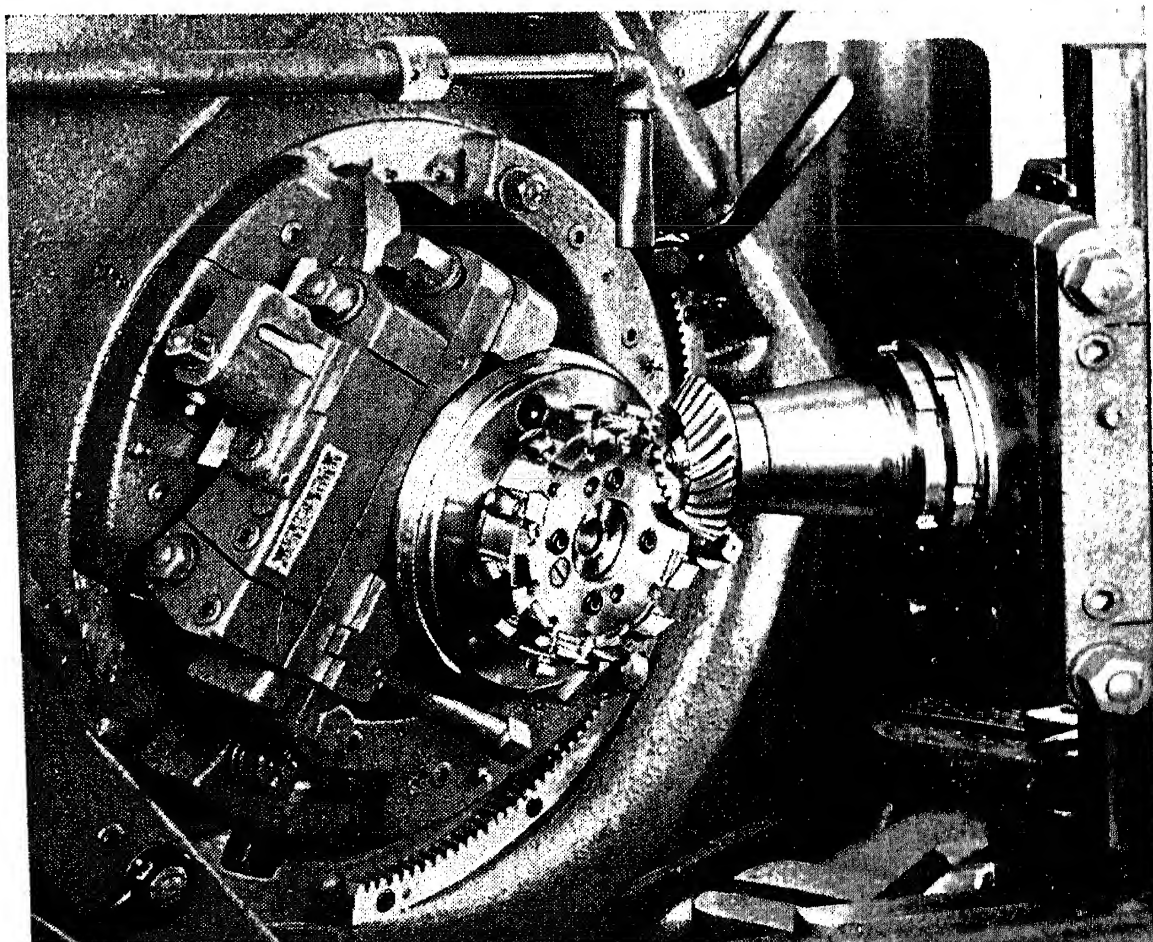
Spiral bevel gear, rotating cutter, and cradle on Gleason Hypoid Generator. (Courtesy Gleason Works.)
